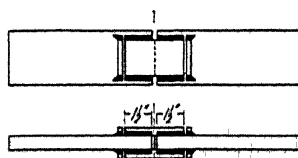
Longitudinal fillet-weld shearing specimen M after machining.
